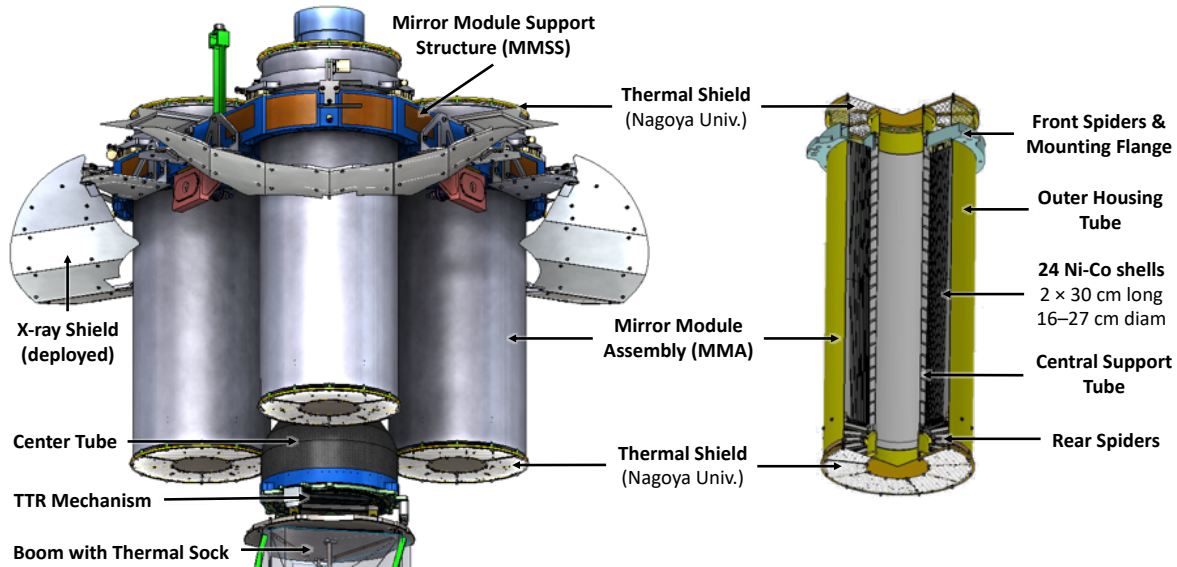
IXPE x-ray optics, comprising three (3) identical Mirror Module Assemblies (MMAs). Left panel shows the MMAs mounted into the mirror module support structure (MMSS), along with other Payload elements (§3.1.3). Right panel displays a cut-away view of an MMA, each with a 200 cm² effective area (at 2.3 keV) and 25" half-power diameter (HPD).
